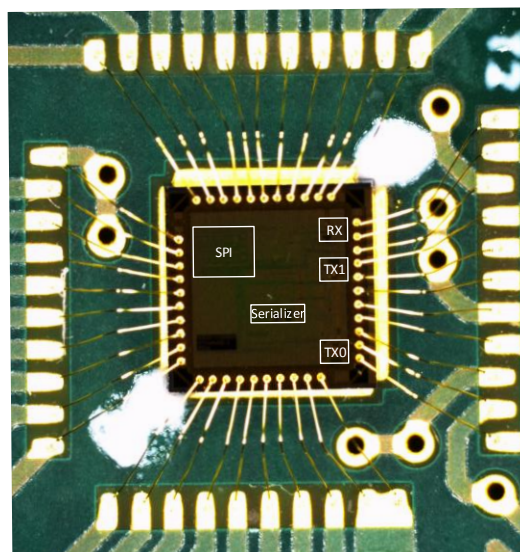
Top view of the fabricated test chip wirebonded on the test board
